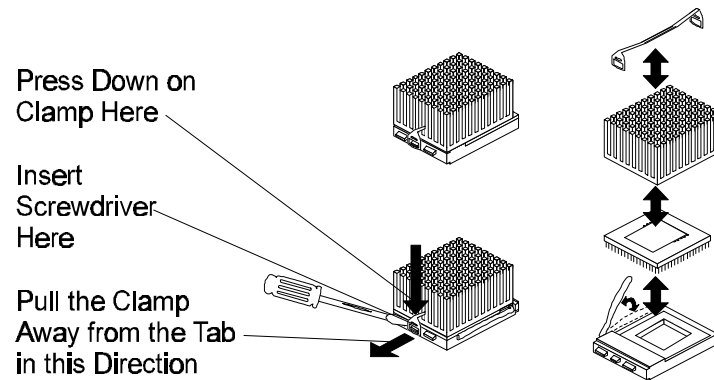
Removing the 6200D Spring Clamp, Heat Sink, and Microprocessor
